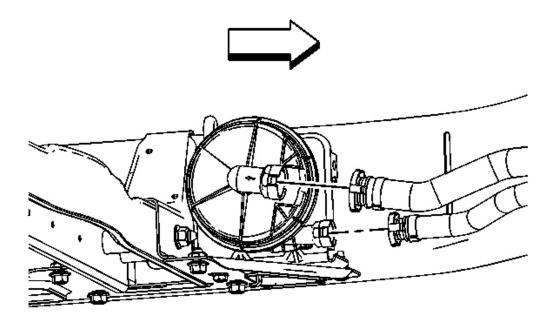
View Of Secondary AIR Pipes & Pump Courtesy of GENERAL MOTORS CORP.
